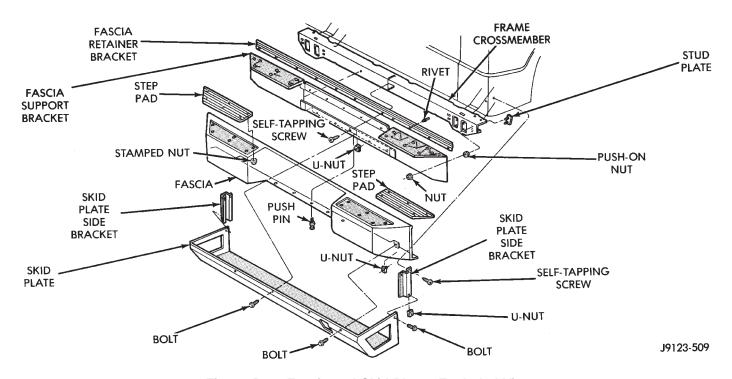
Rear Fascia and Skid Plate—Exploded View
